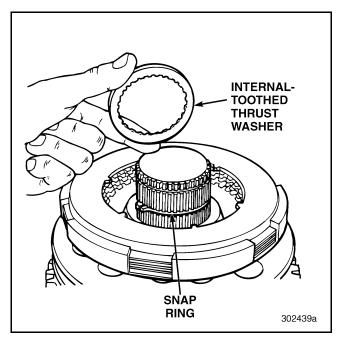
Installing Internal-Toothed Thrust Washer (T313L21/T318L21 Shown)
